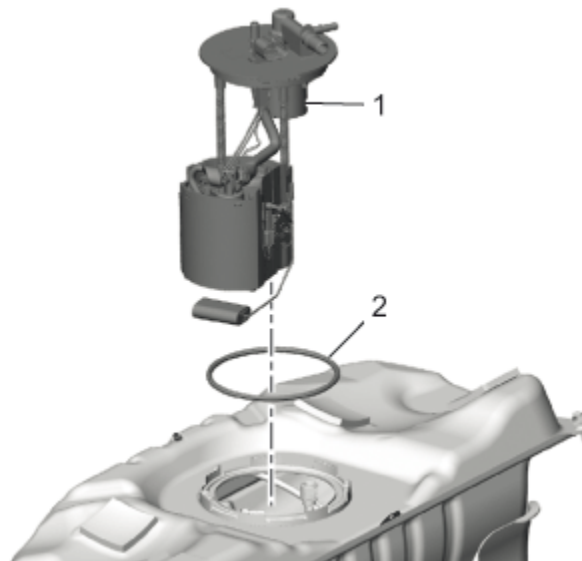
Fuel Tank Fuel Pump Module And Seal
